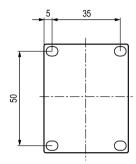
Drilling plan for contactors with screw-type connections and ring cable lug connections (size S00)
